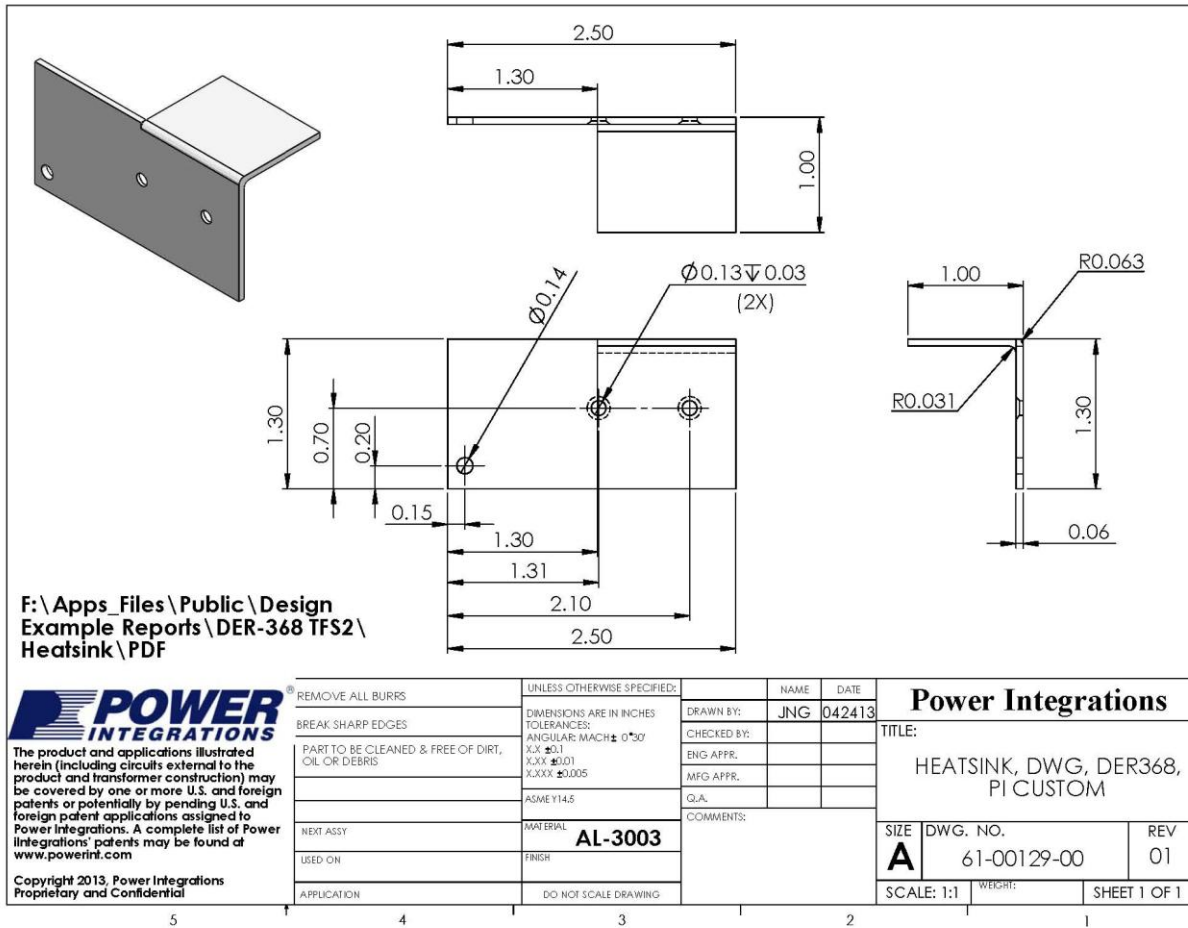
Secondary Heat Sink Sheet Metal Drawing.
